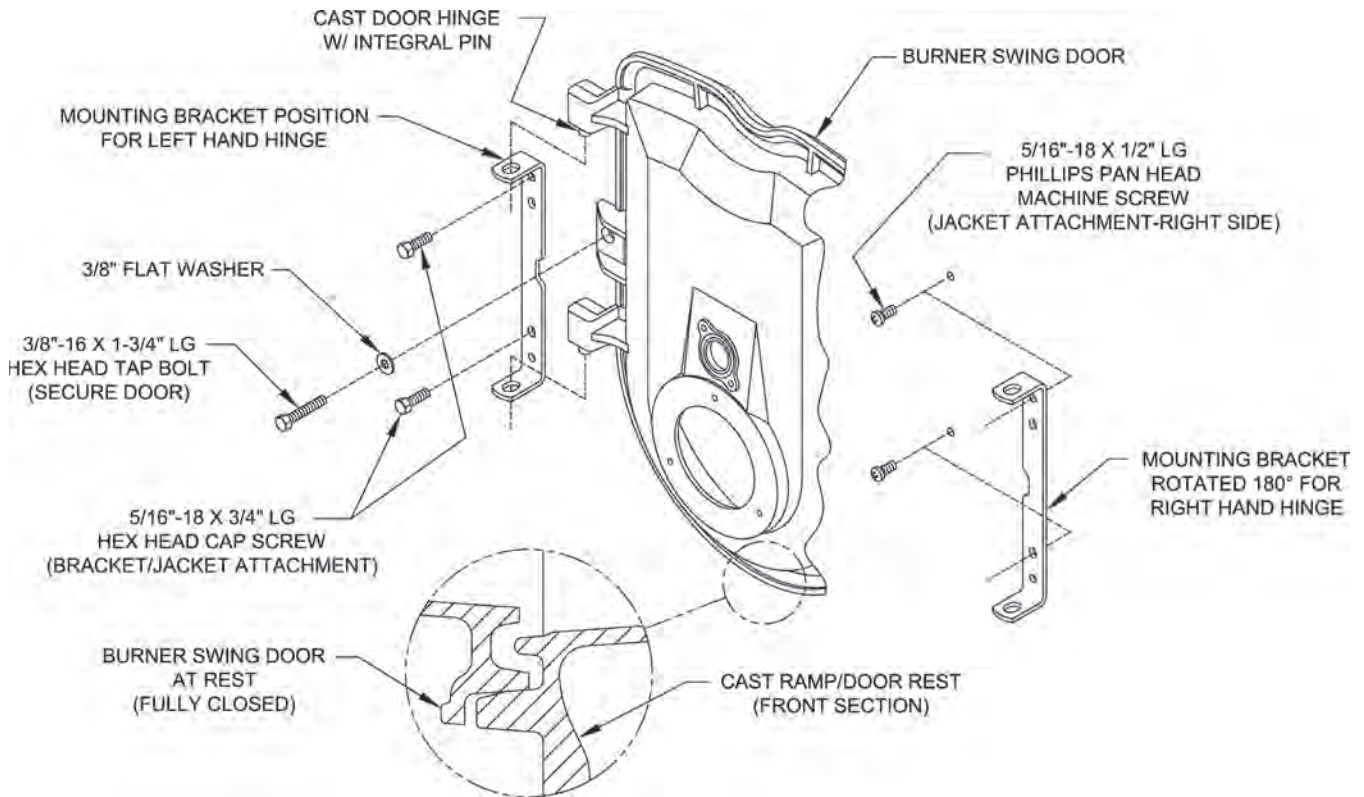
A: Partial Front View - Burner Swing Door Mounted to Boiler - Fully Closed and Secured
